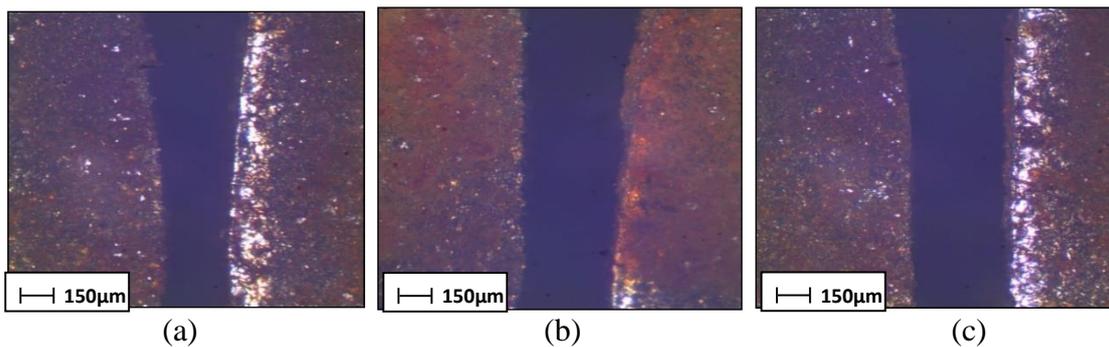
Cross-sectional views for taper formation at 0.50MPa assisted gas pressure with (a) 750 W and 1500mm/min; (b) 1750 W and 2500mm/min; and (c) 2750 W and 3500mm/min.
